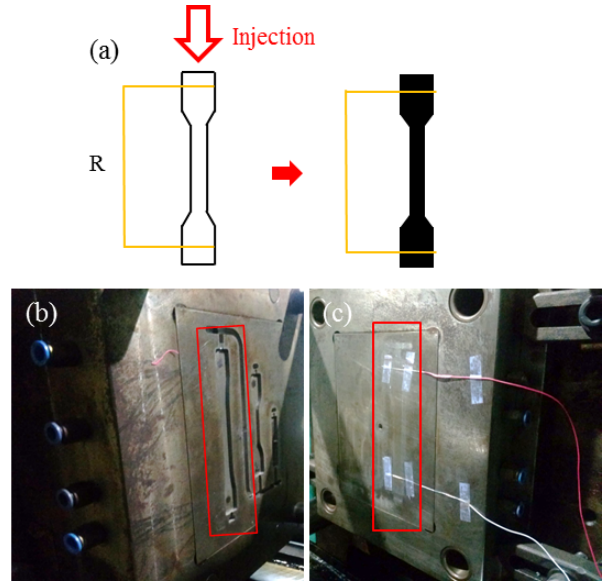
Test system and photograph of fiber arrangement detection of CF/PP composites using ER method : (a) test system; (b) Injection mold and (c) attached ER 2 probe on mold.
